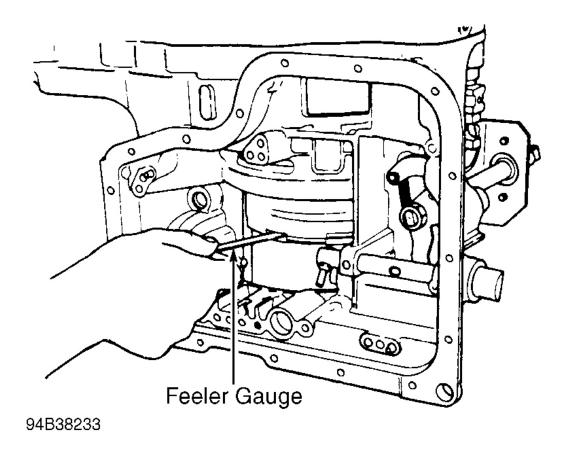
Measuring Front Drum End Play Courtesy of FORD MOTOR CO.
